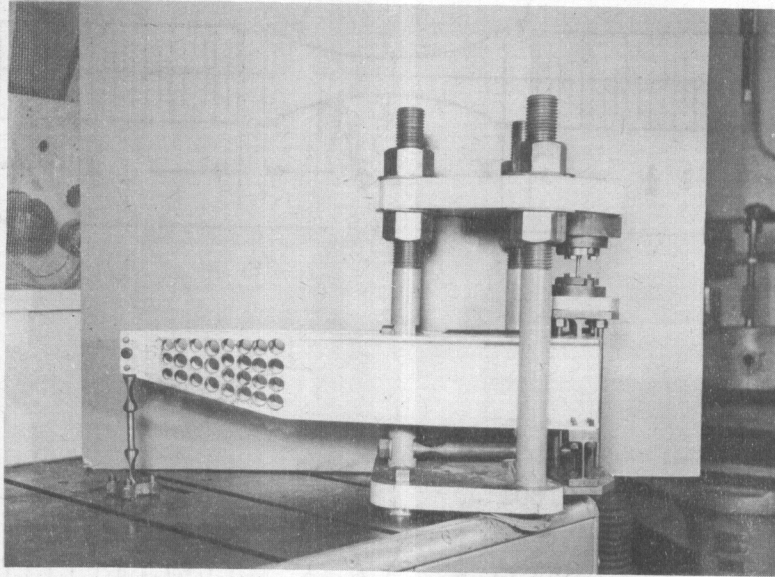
PHOTOGRAPH OF AMPLIFICATION FIXTURE.
